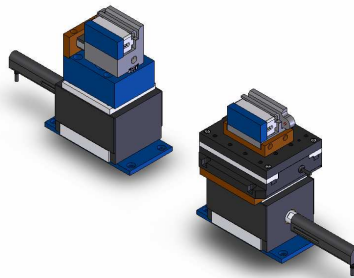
Detail of the 3D CAD design view of optical fiber sub-assembly.
